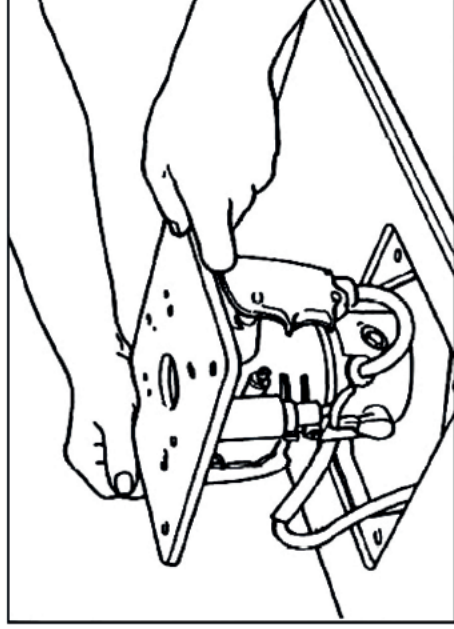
Use router base plate as a template to mark the location of each mounting hole onto the table plate.
